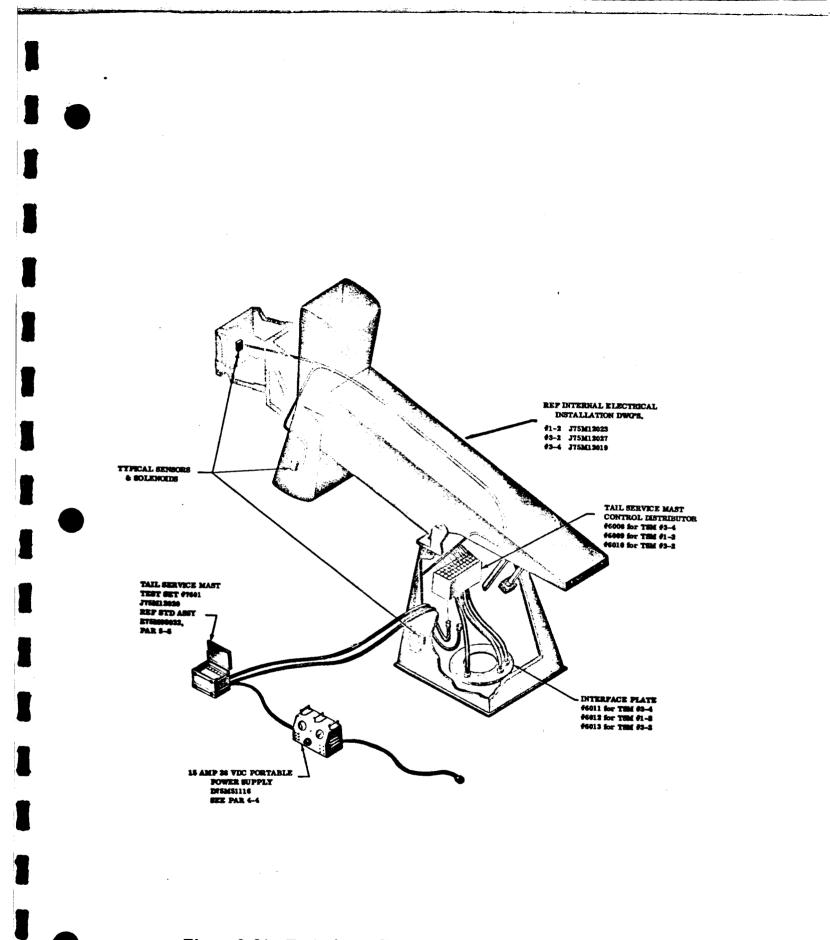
Typical Installation, TSM Test Set E75M12020
